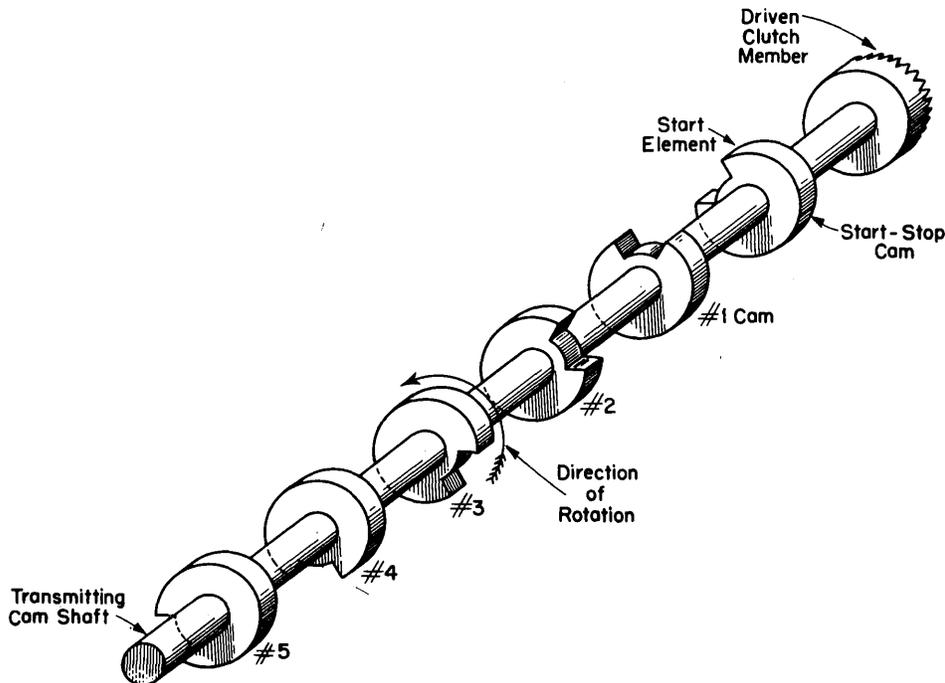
Exploded View of Keyboard Cam Sleeve Assembly
